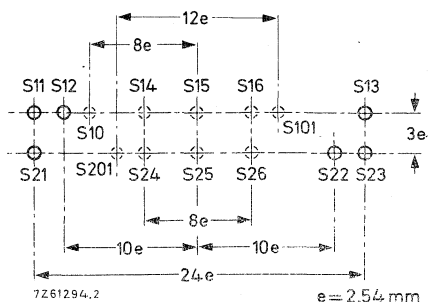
Hole pattern of the printed-wiring board for a tandem potentiometer (viewed on component side).
